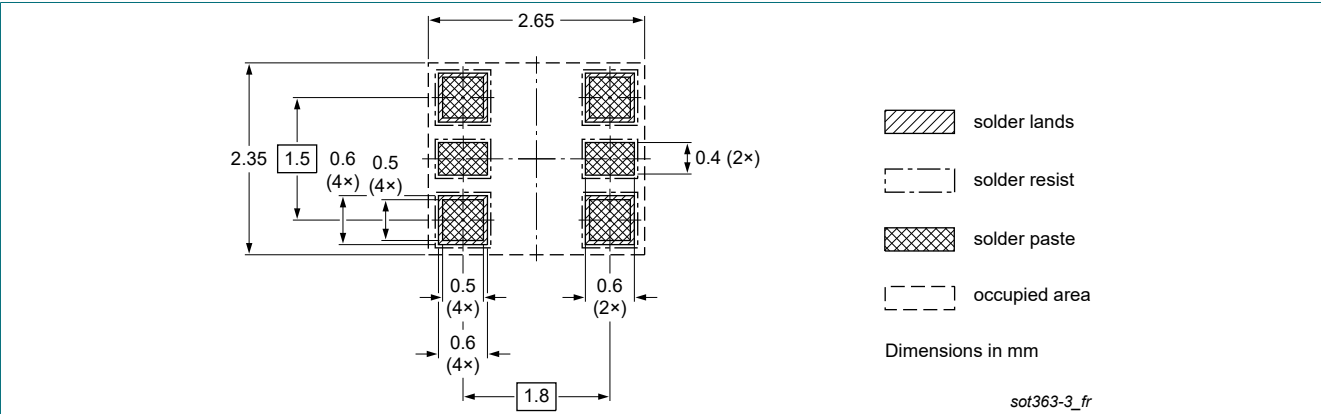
Reflow soldering footprint for TSSOP6 (SOT363-3)
